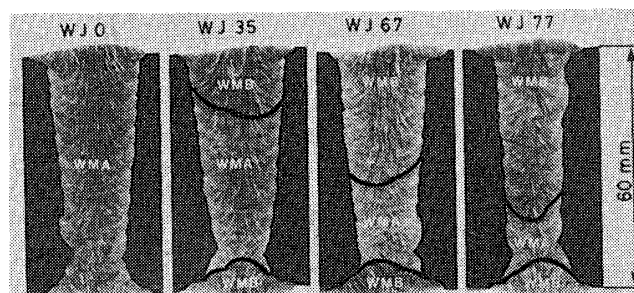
Cross-sectional view of welded joints (WMA and WMB are deposited with wire A and B, respectively)
